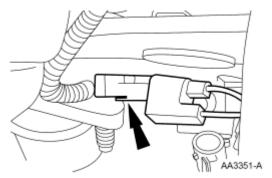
Radio Ignition Interference Capacitor Courtesy of FORD MOTOR CO.
